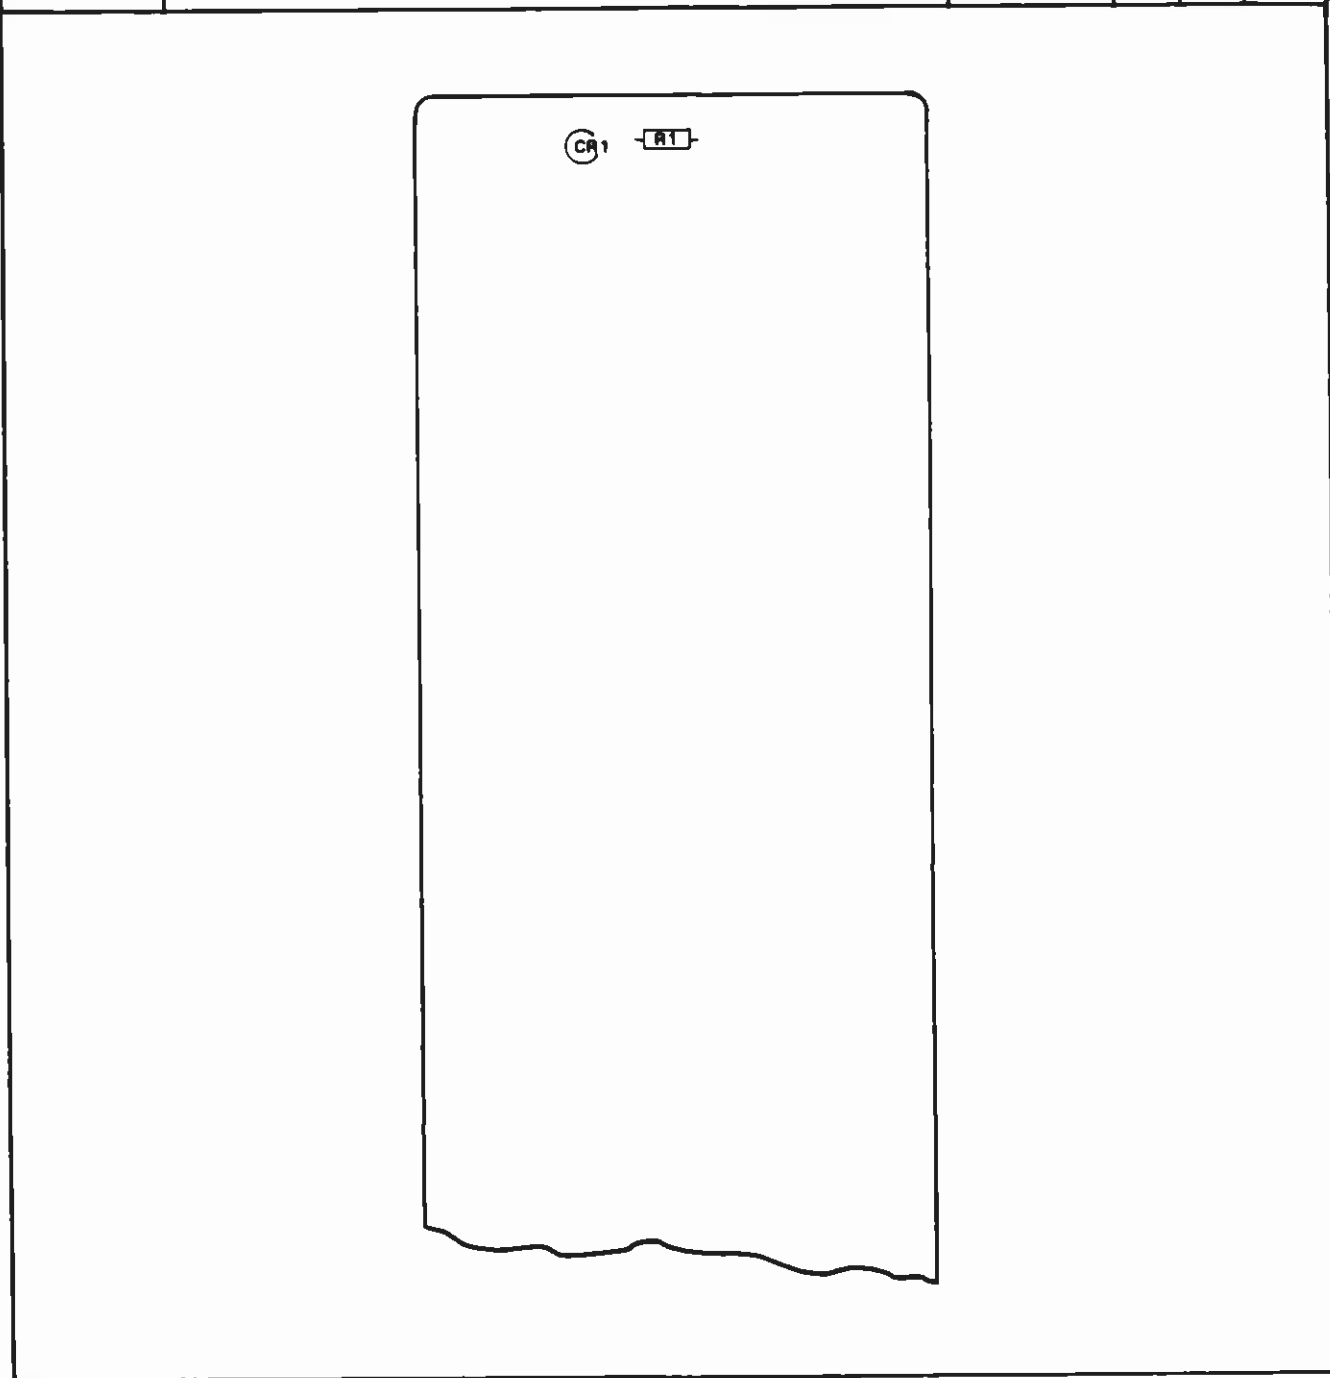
NO DISPLAY PCB ASSEMBLY (-05 OPTION)
